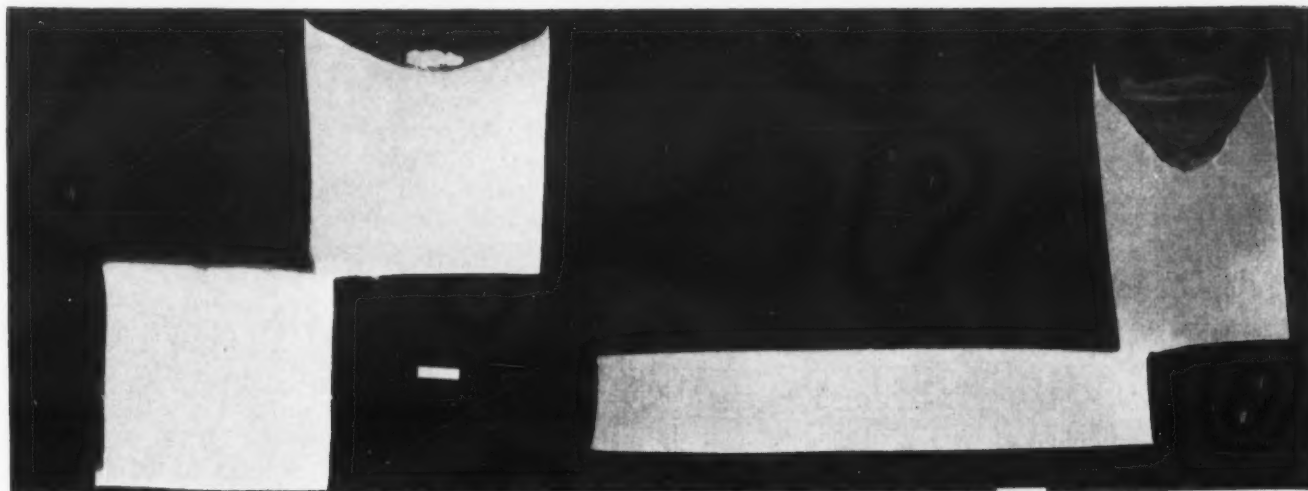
Photographs of sections of edge risered cube and plate. Pouring temperature 2650 F, green-sand molds. Left—5 in. cube; right—10 in. x 8 in. x 1-2/3-in. plate.
